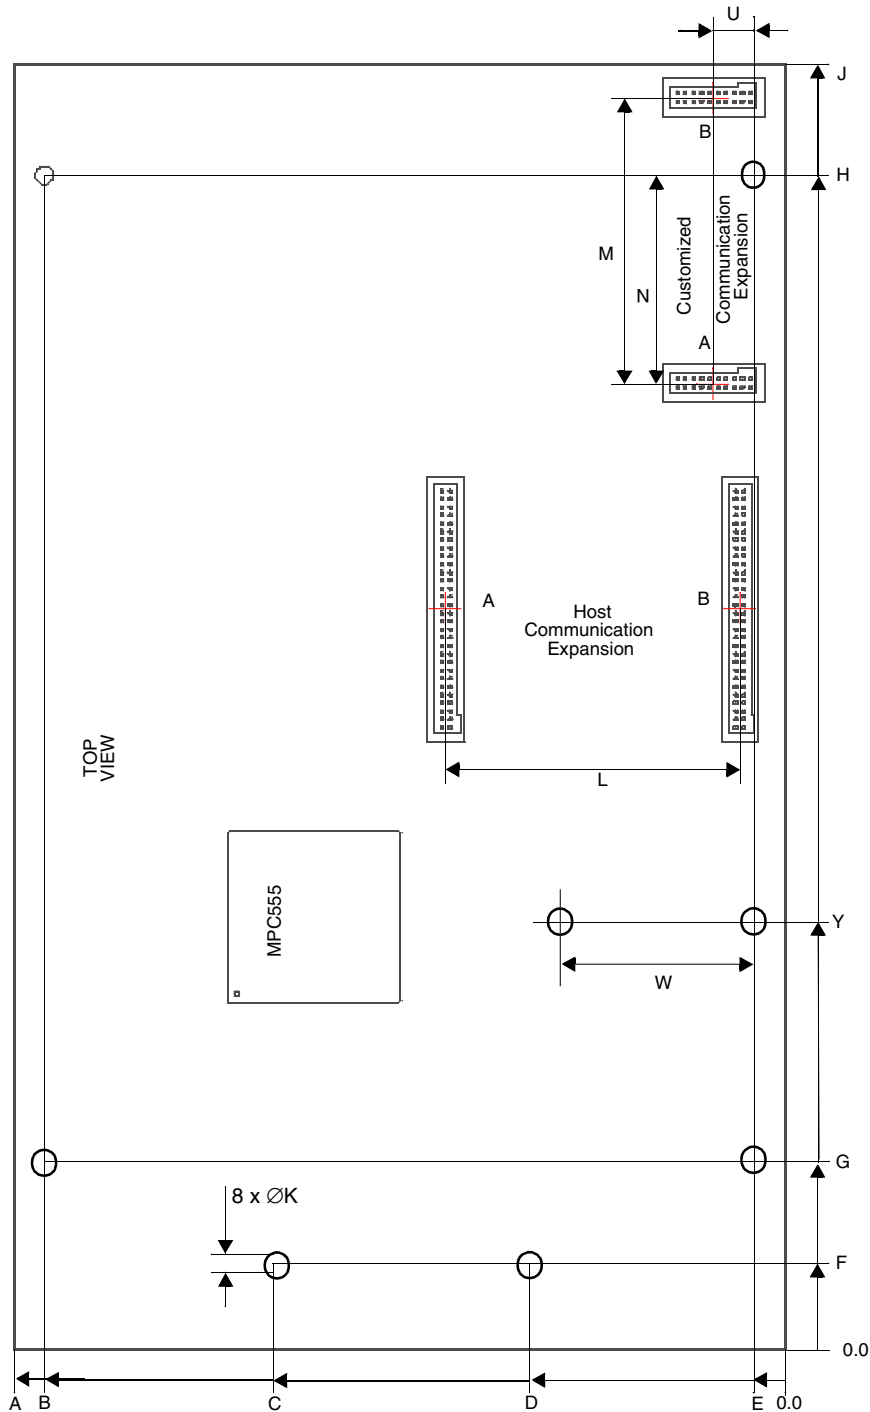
Mounting Holes and Top-Side Connector Dimensions
